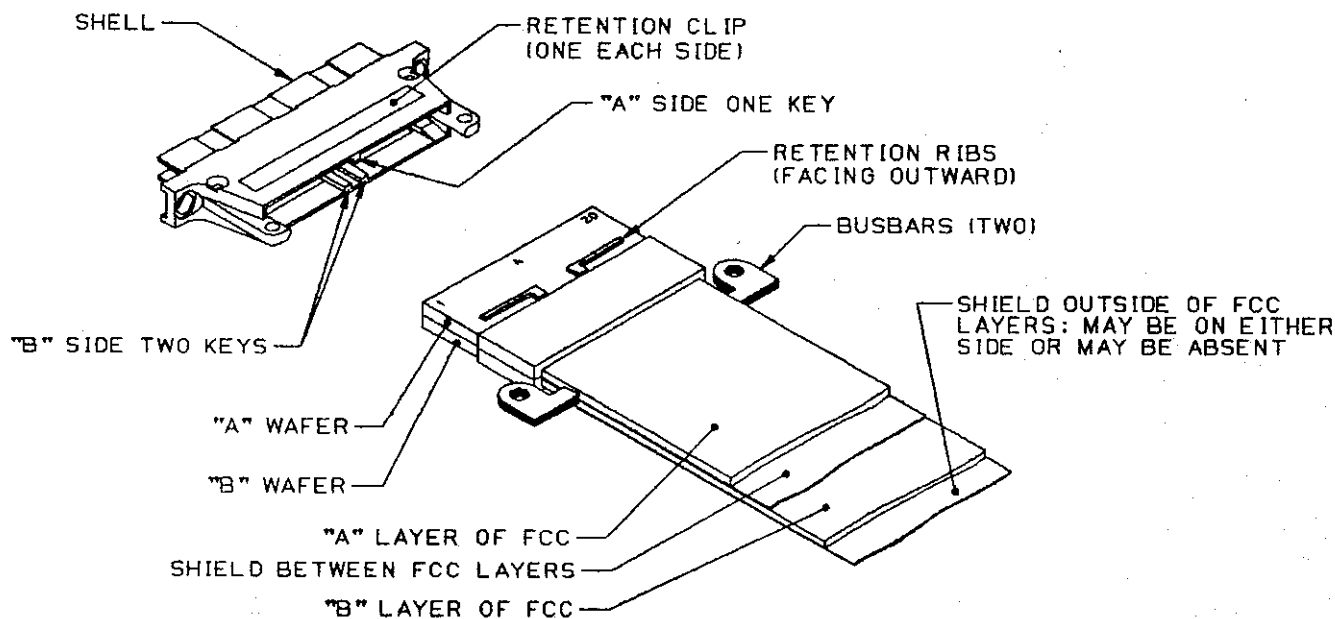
Terminated Insert Pair Ready for Insertion into Shell
